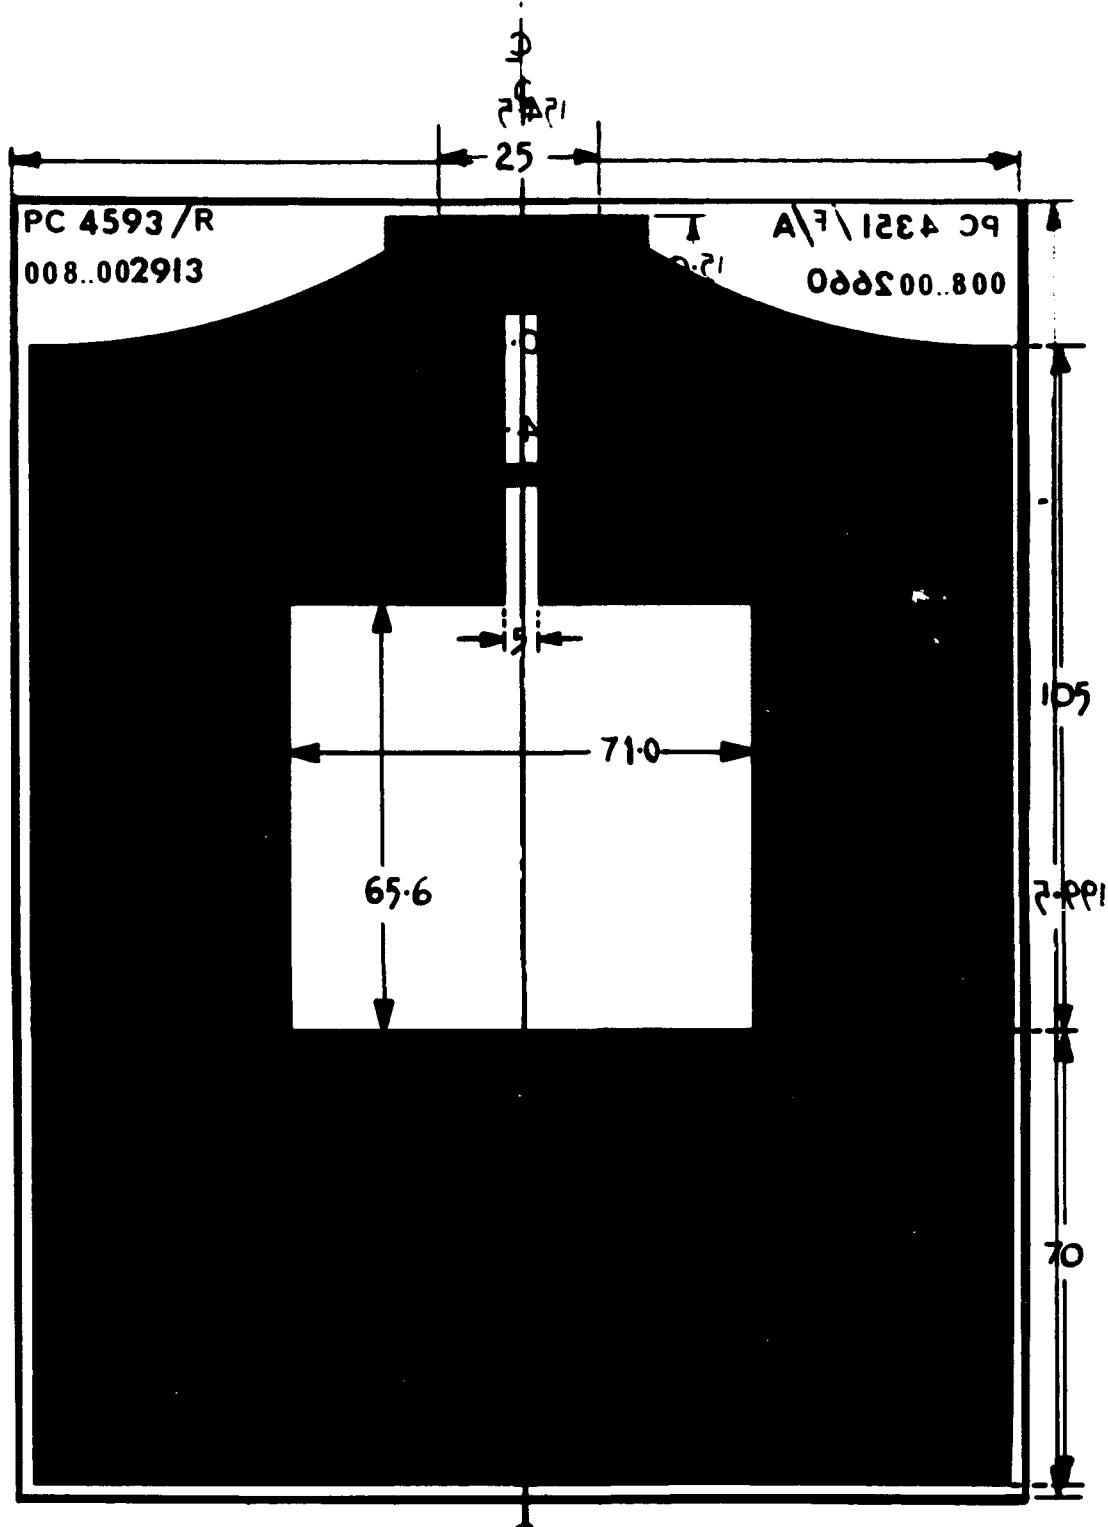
P R.F. TRANSFORMER 100-500 MHz DIMENSIONS
